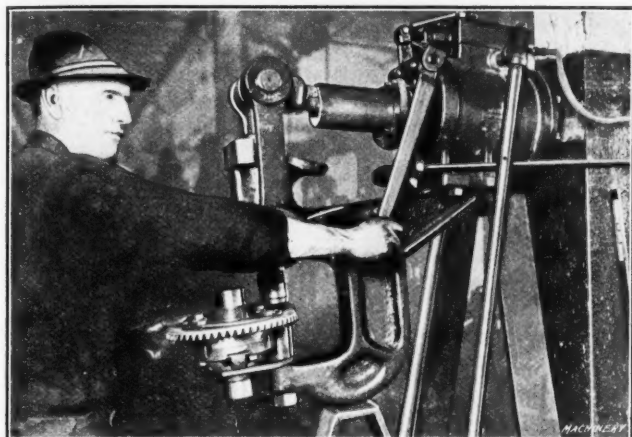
Attaching the Main Drive Gear to the Differential Case by Means of a Pneumatic Riveter
